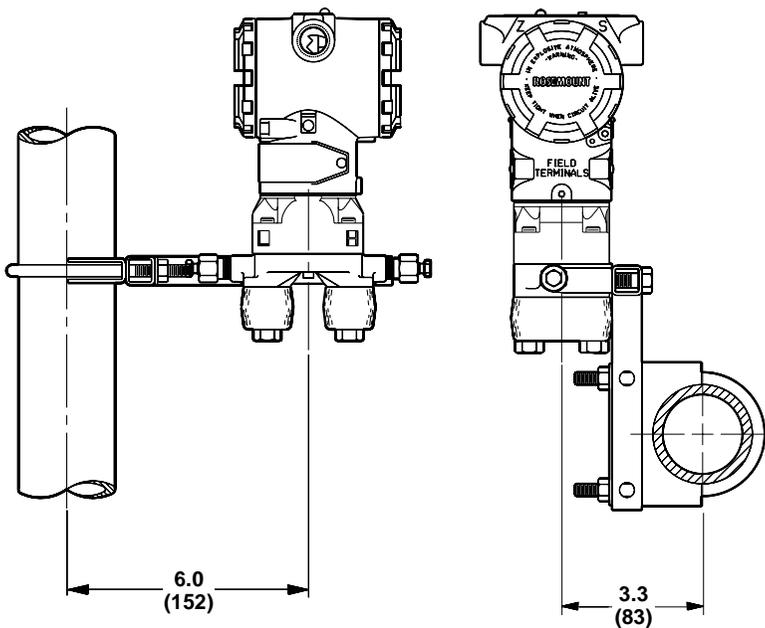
Coplanar Flange Mounting Configurations with Optional Bracket (B4) for 2-in. Pipe or Panel Mounting.
